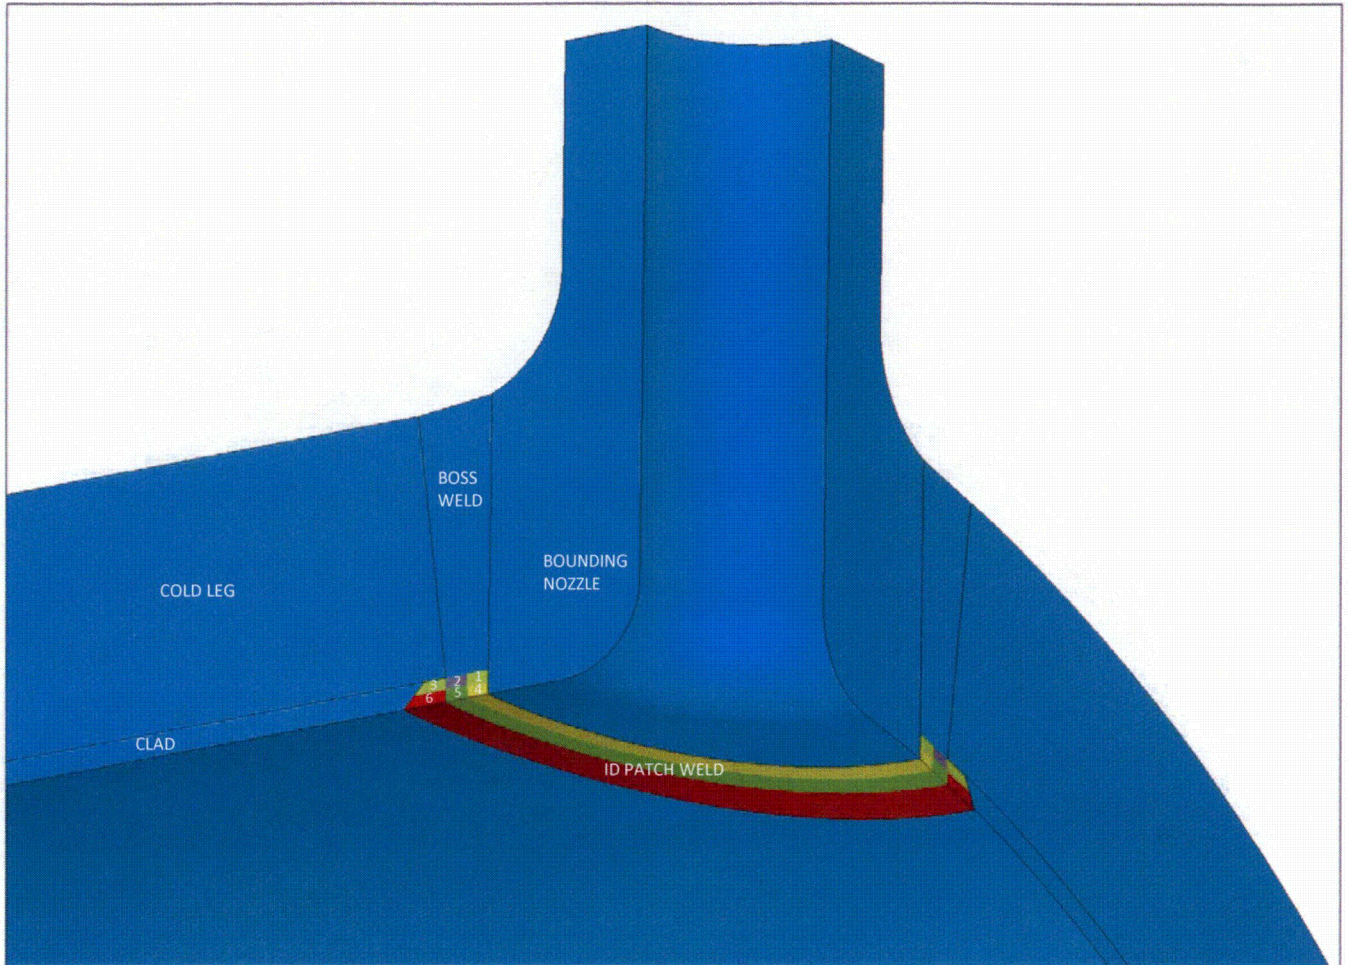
Weld Nugget Definitions for the ID Patch Weld
